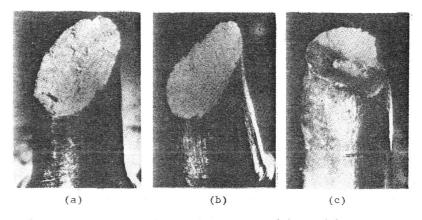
Fracture modes of the specimens, (a) 7475(U), (b) 7010(P), (c) 7475(O)
